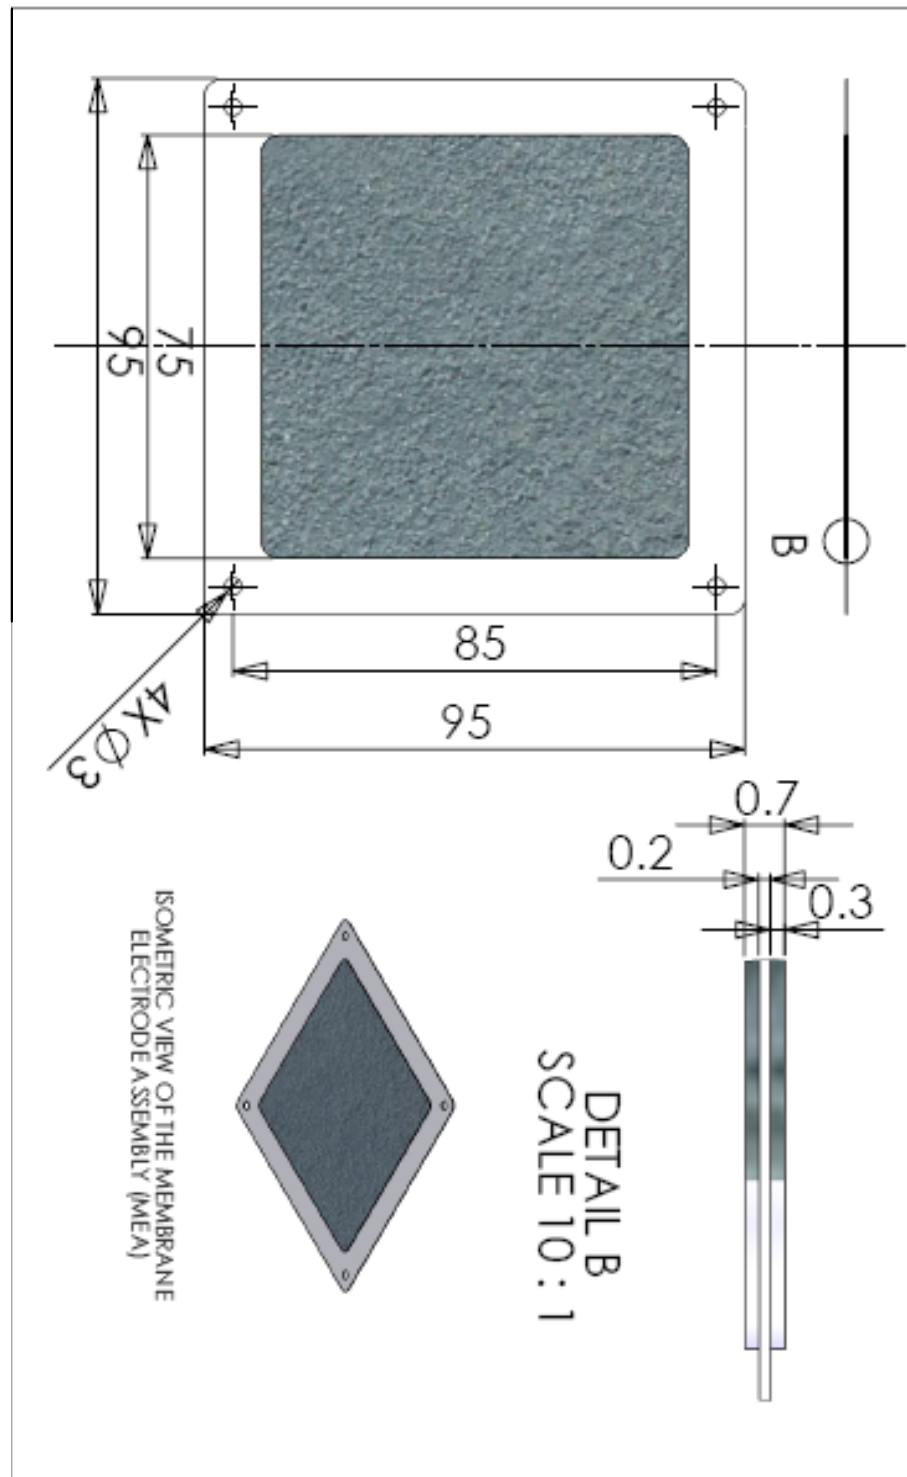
Drawing of the membrane electrode assembly (MEA)
